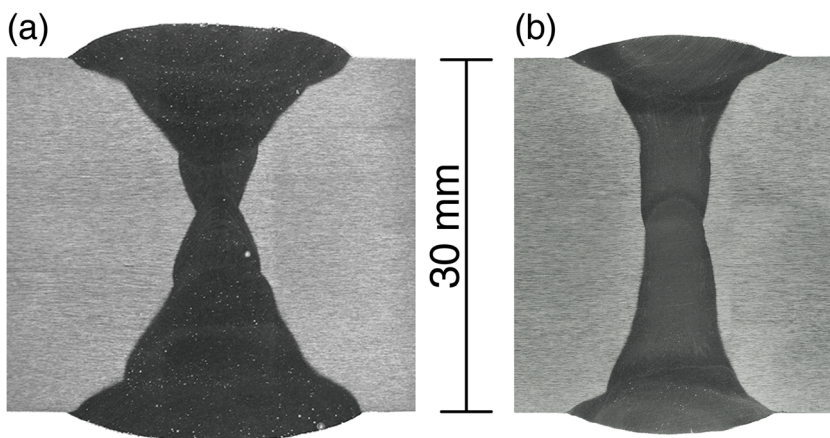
Welds of a MIG welding and b hybrid laser-MIG welding plus MIG welding
